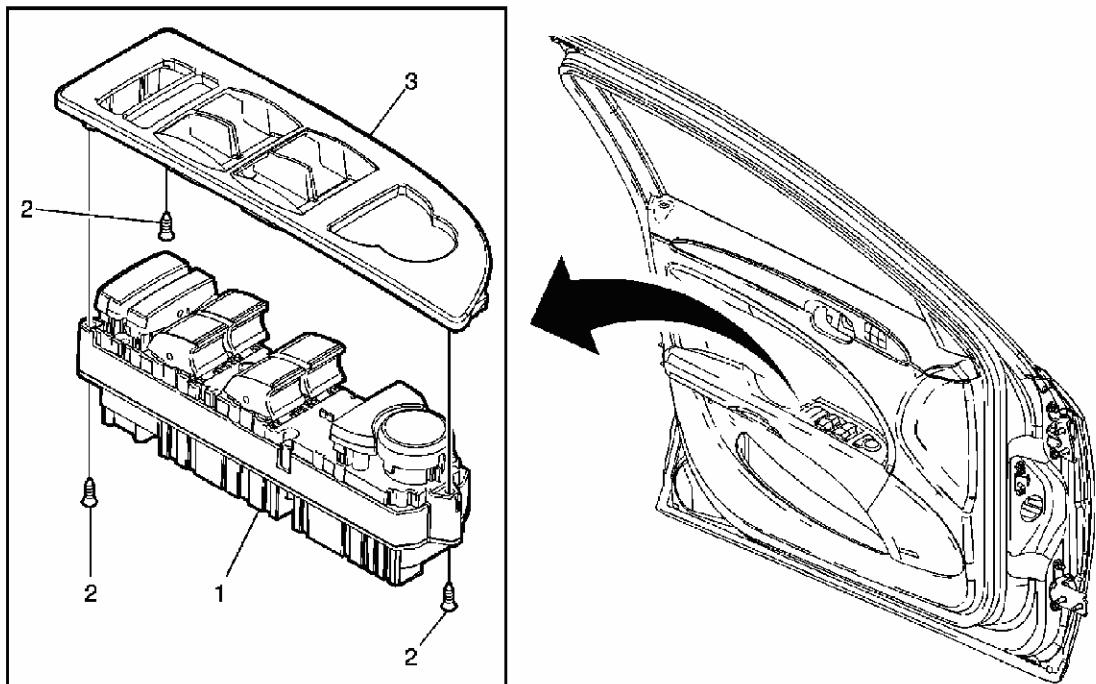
View Of Driver Side Door Lock and Side Window Switch
